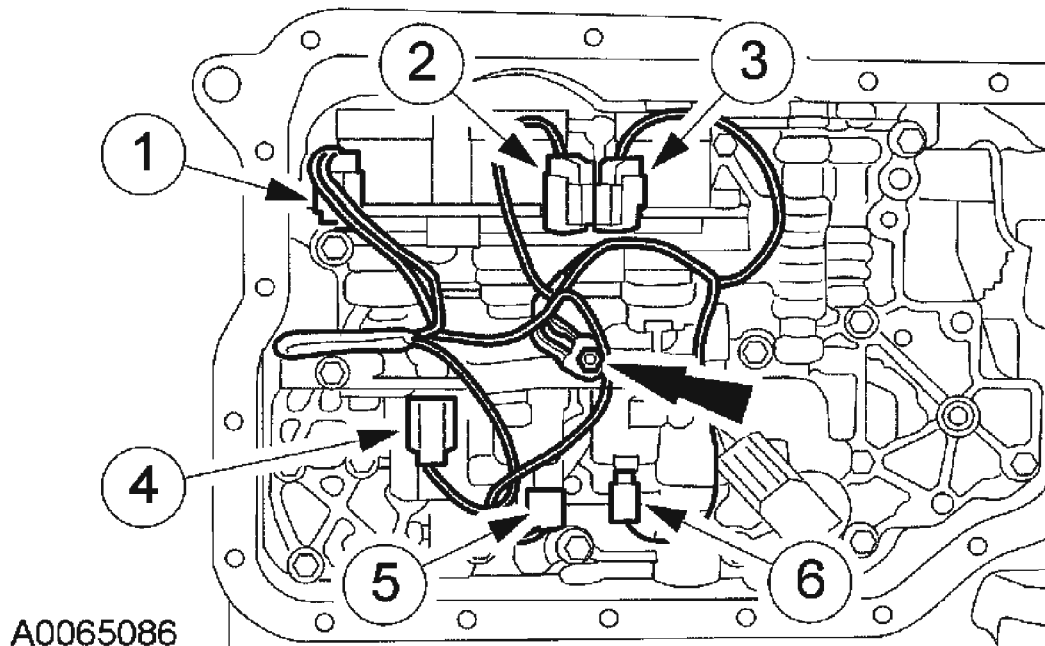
Removing Ground Wire Bolt, Disconnecting Electrical Connectors And Removing Wire Harness
